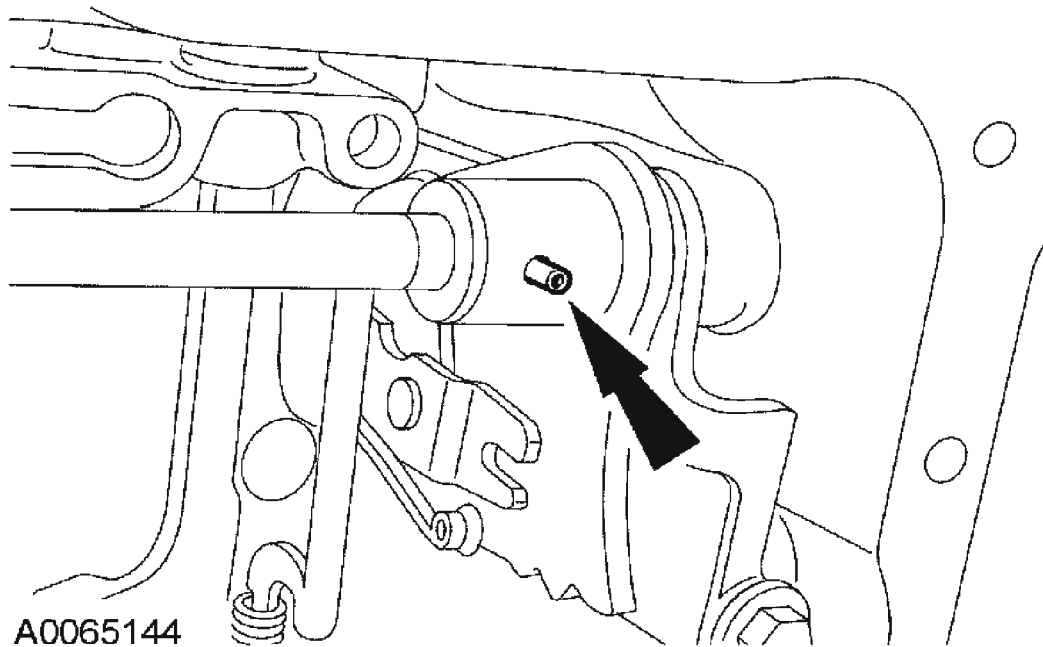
Installing New Manual Lever Shaft Roll Pin
